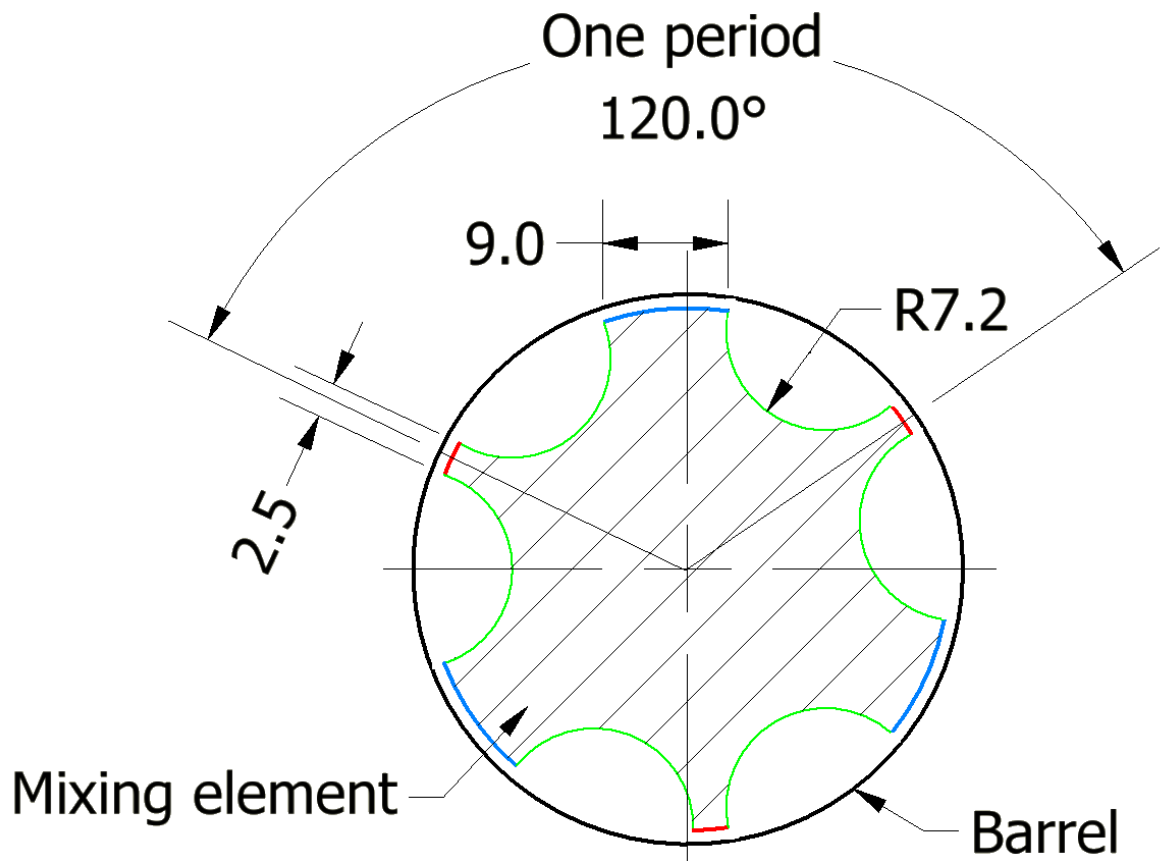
Cross section view of “Open” Maddock mixer (dimensions are in mm) where the gap between the barrel and the wiping flight (section with 2.5mm width) is 0.4 mm
